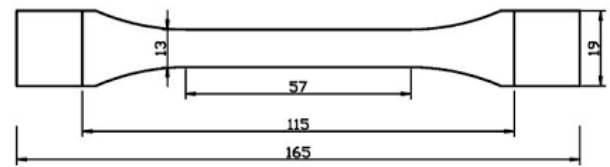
Tensile test specimen as per ASTM D638 I (All dimensions in mm)
